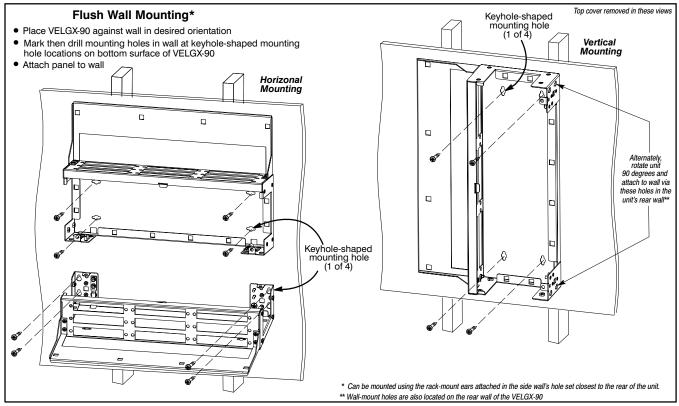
Typical Wall Mounting Views, Mounting Ears Not Used
